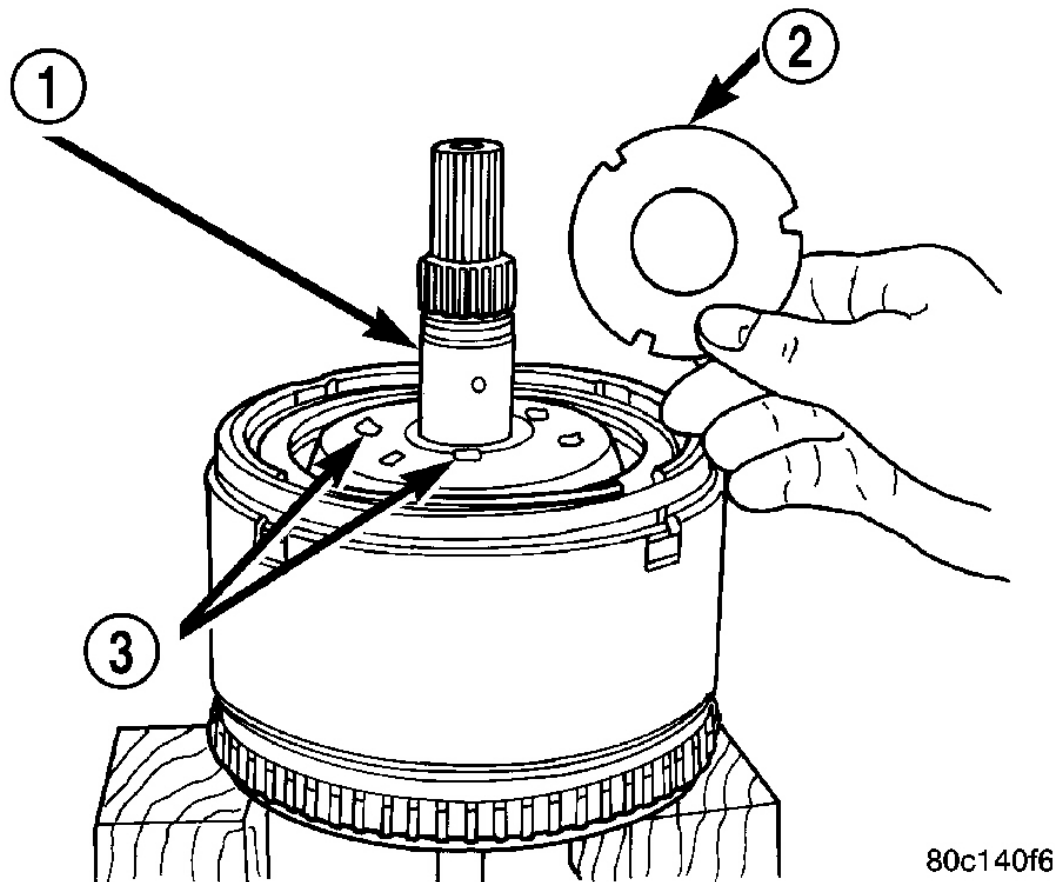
Installing Front Sun Gear Assembly And #4 Thrust Washer
